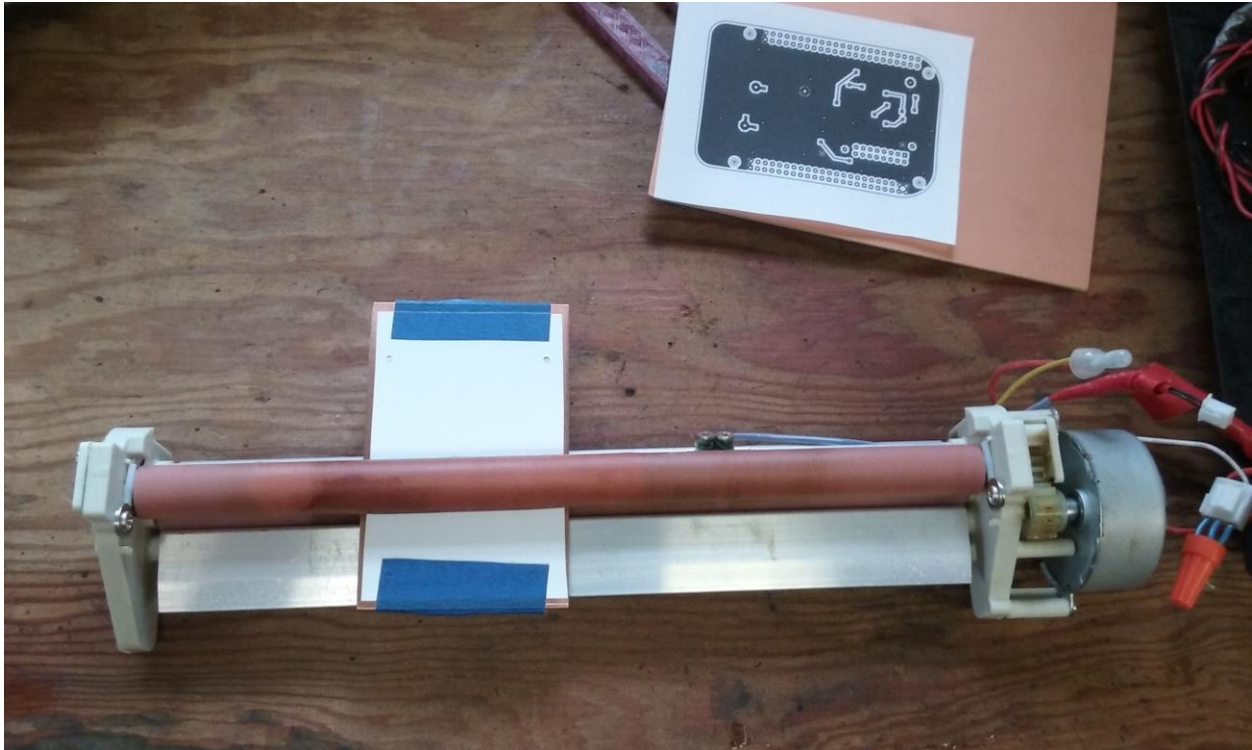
A copper-clad fiberglass board is run under a hot laminator to transfer the PCB design onto the copper.
